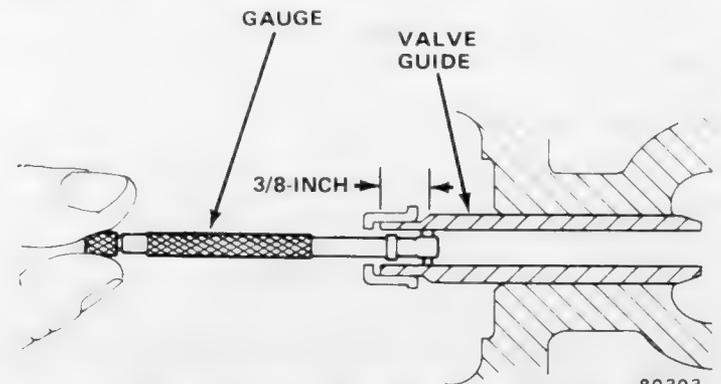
B-131 Measuring Valve Guide with Telescoping Gauge
